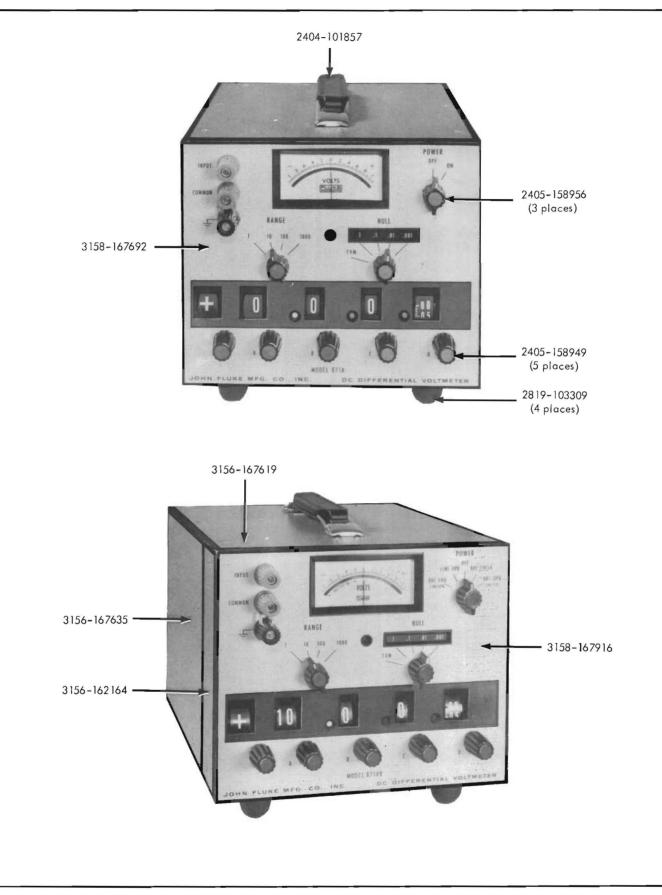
FINAL ASSEMBLY (Sheet 2 of 3)
